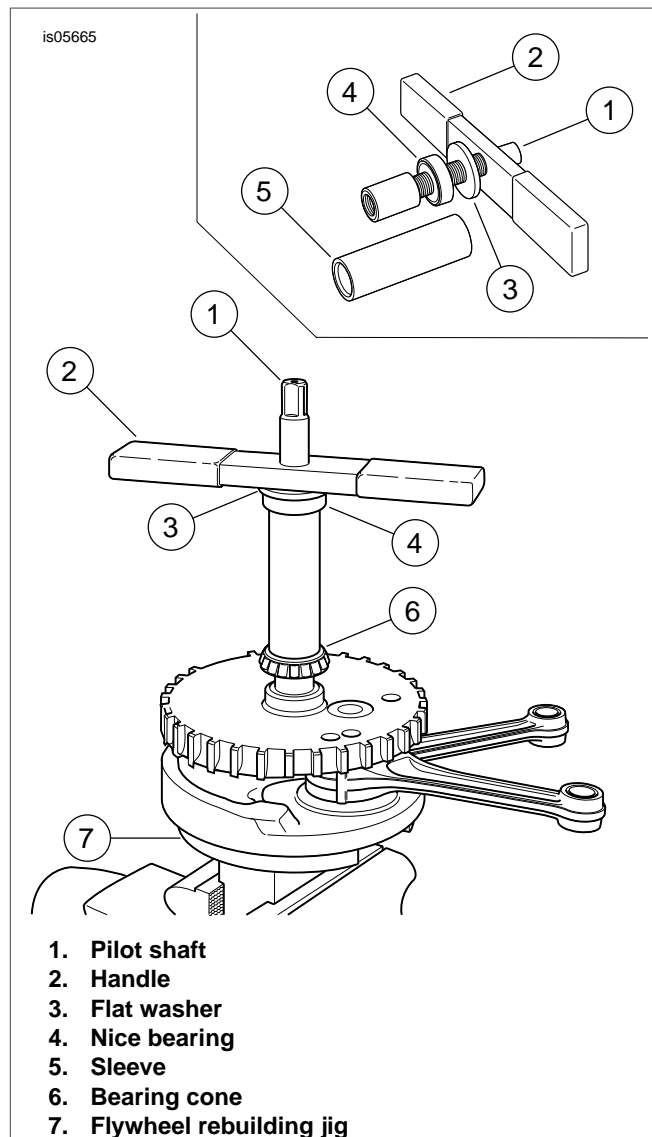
Sprocket Shaft Timken Bearing Cone Installer
